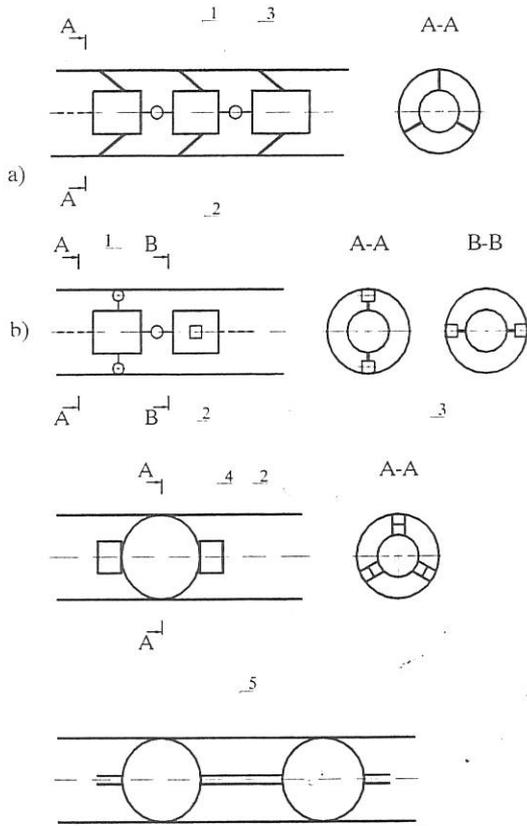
The schemes of crawling robots for curved pipes: a) the principal scheme of the drive, b) the fragments of the drive's element 1 – the element of the vibratory drive, 2 – the elastic hinge joints, 3 – the hinge joint elastic contact supports, 4 – segments of the cylinder, 5 – rings
